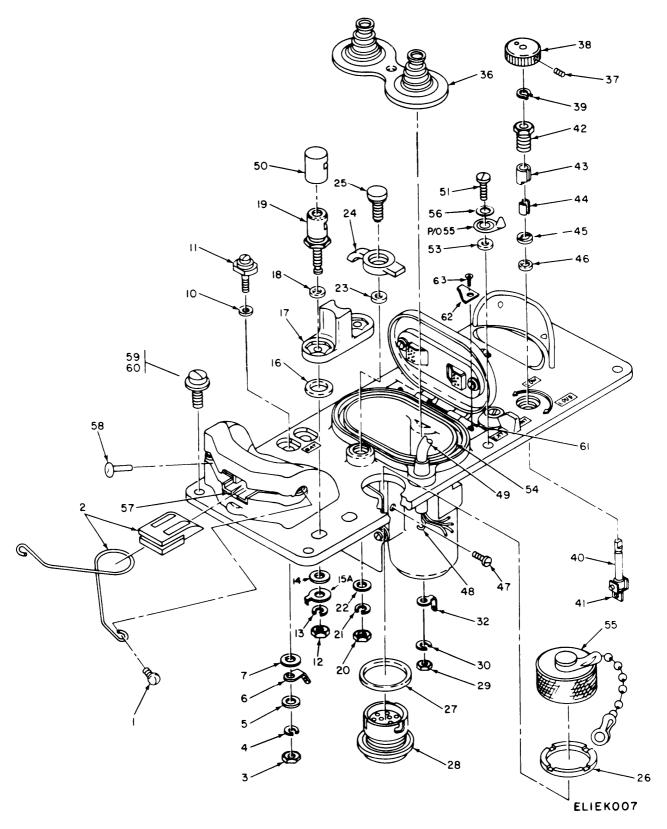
Panel assembly, top exploded view (Sheet 1 of 3)
